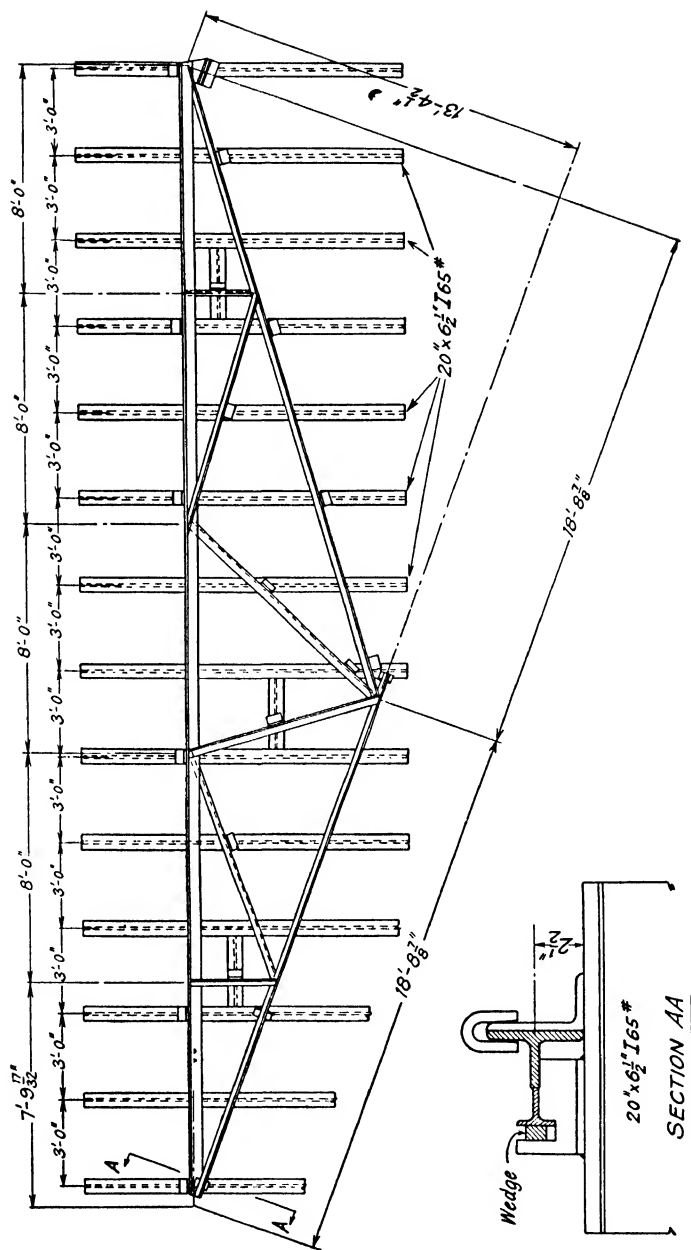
WELDING TABLE ARRANGED FOR ASSEMBLING TRUSSES
